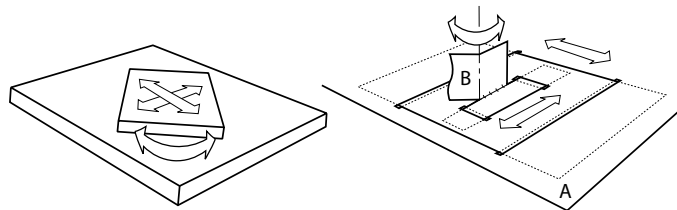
A planar joint constructed with a serial chain of elemental joints.
